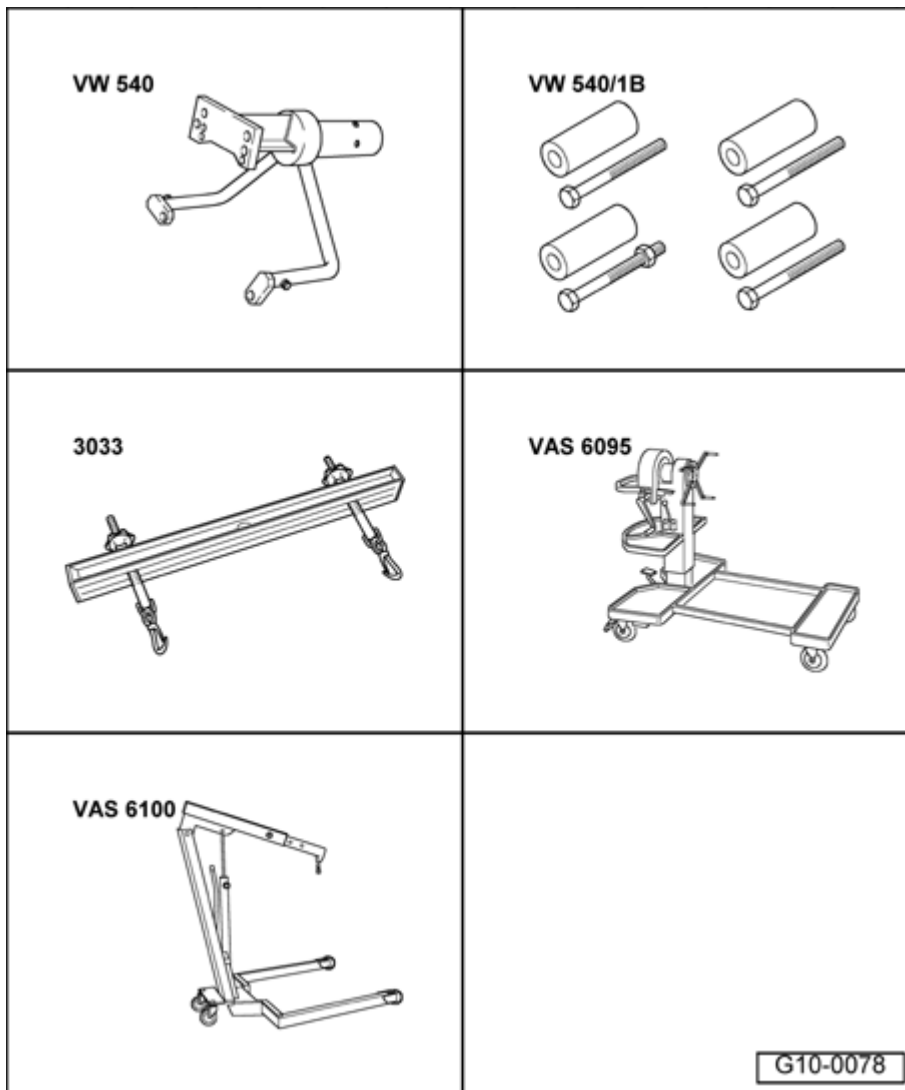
Identifying Special Tools - Engine, Securing To Engine Stand
